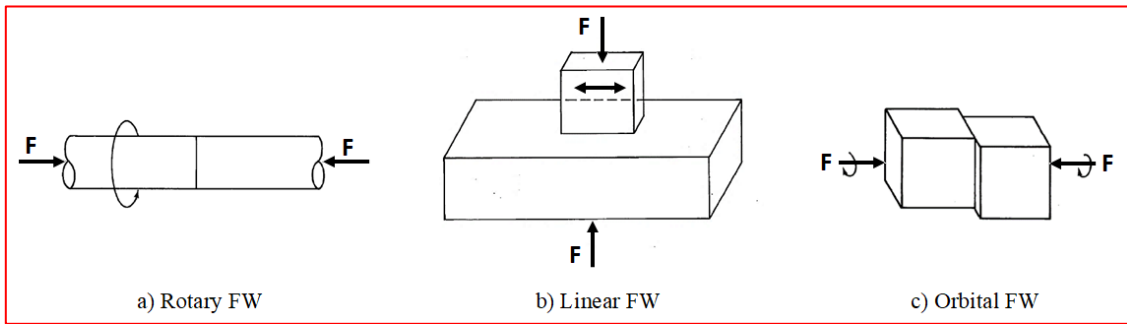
Relative movements of the workpieces in friction welding [6].
